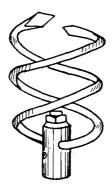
TYPICAL SKETCH OF DOUBLE CORKSCREW
